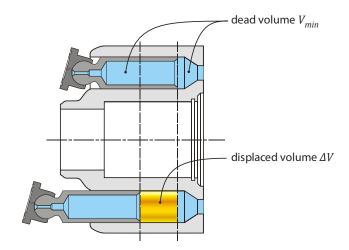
V_{min} and ΔV of a slipper type axial piston machine
